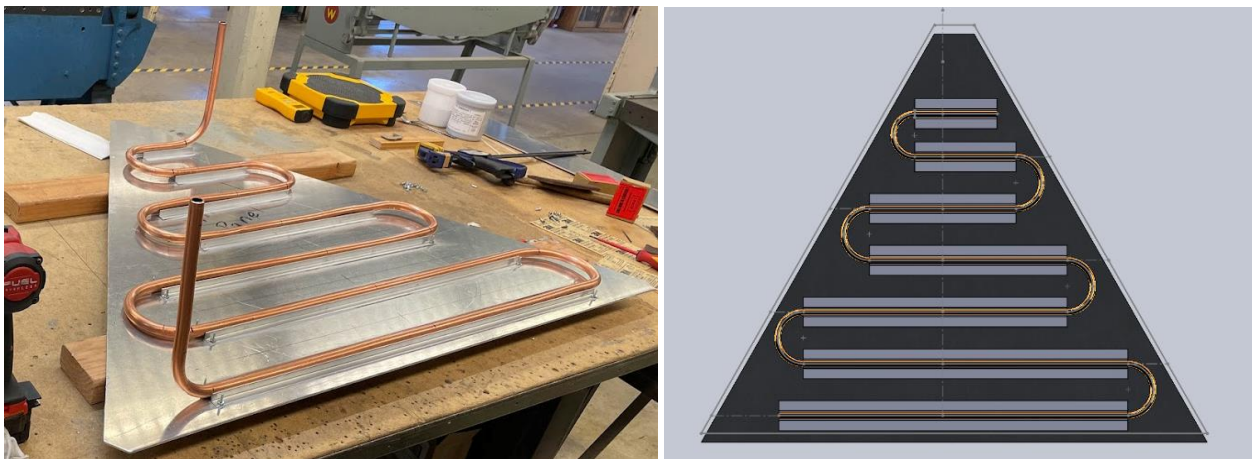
Physical thermal transfer panel (left) and the CAD model (right)
